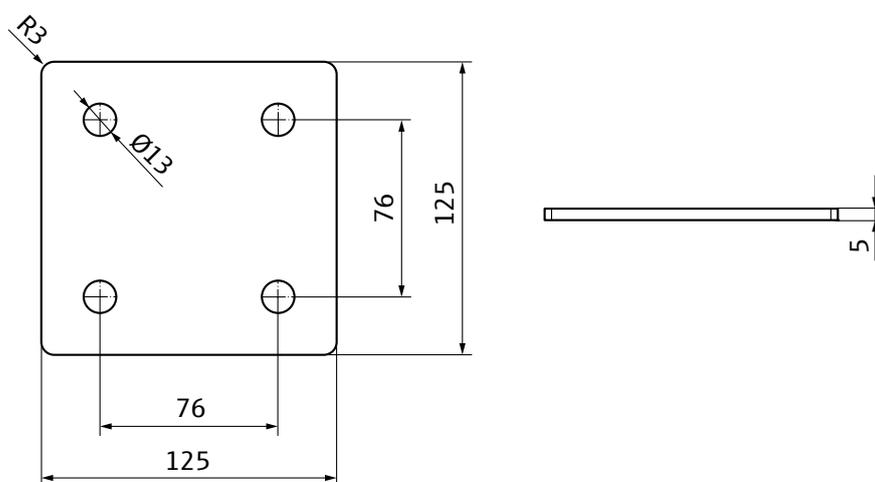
Drilling pattern for wall mounting of the SPU bracket
